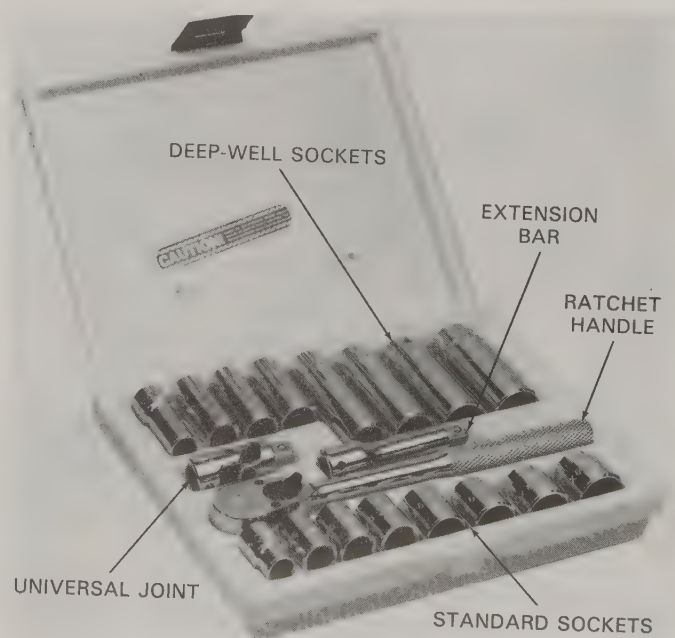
Socket wrench set with both standard-length and deep-well sockets. (Mac Tools, Inc.)
